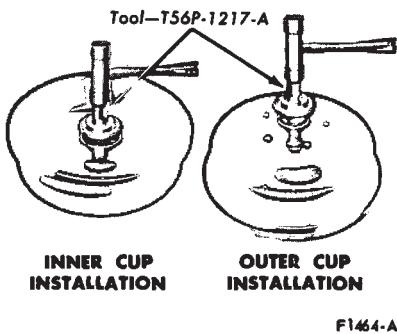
Installing Front Wheel Bearing Cups—Drum
